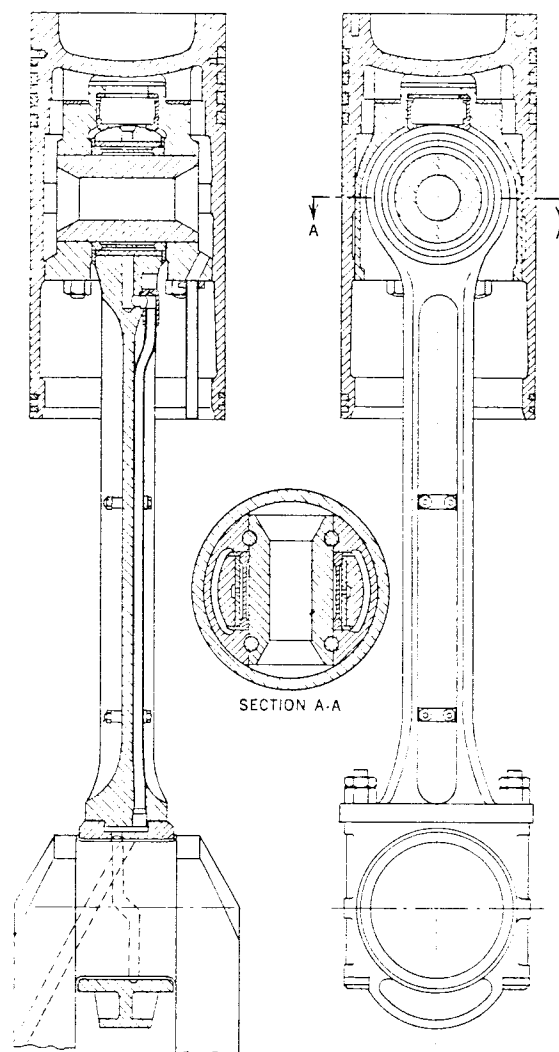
Assembly of Piston and Connecting Rod Petter Superscavenge Engine.
